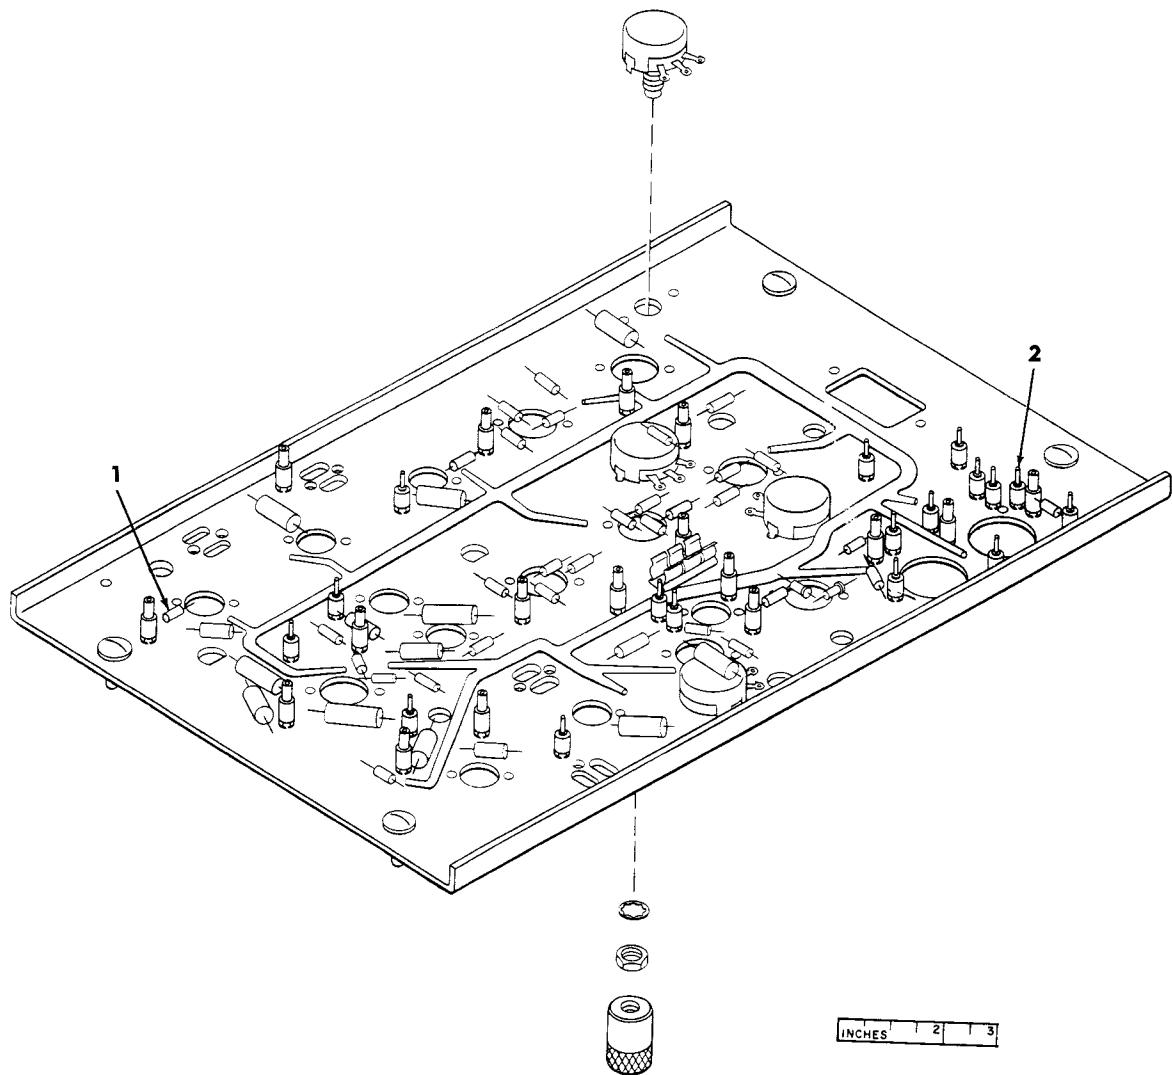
Synchronizer, electrical (9989392)—partial exploded view
